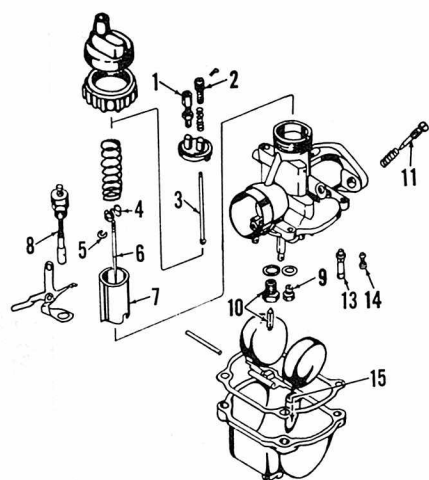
Exploded view of Mikuni carburetor used on Hodaka Ace 90. Make certain clip retainer (4) is installed.
